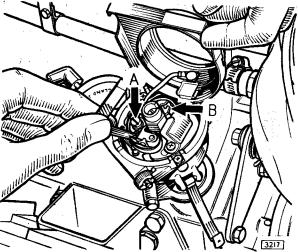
Checking the gap—the screw "A" secures the fixed contact plate; the contact plate is adjusted by turning a screwdriver in slot "B".
